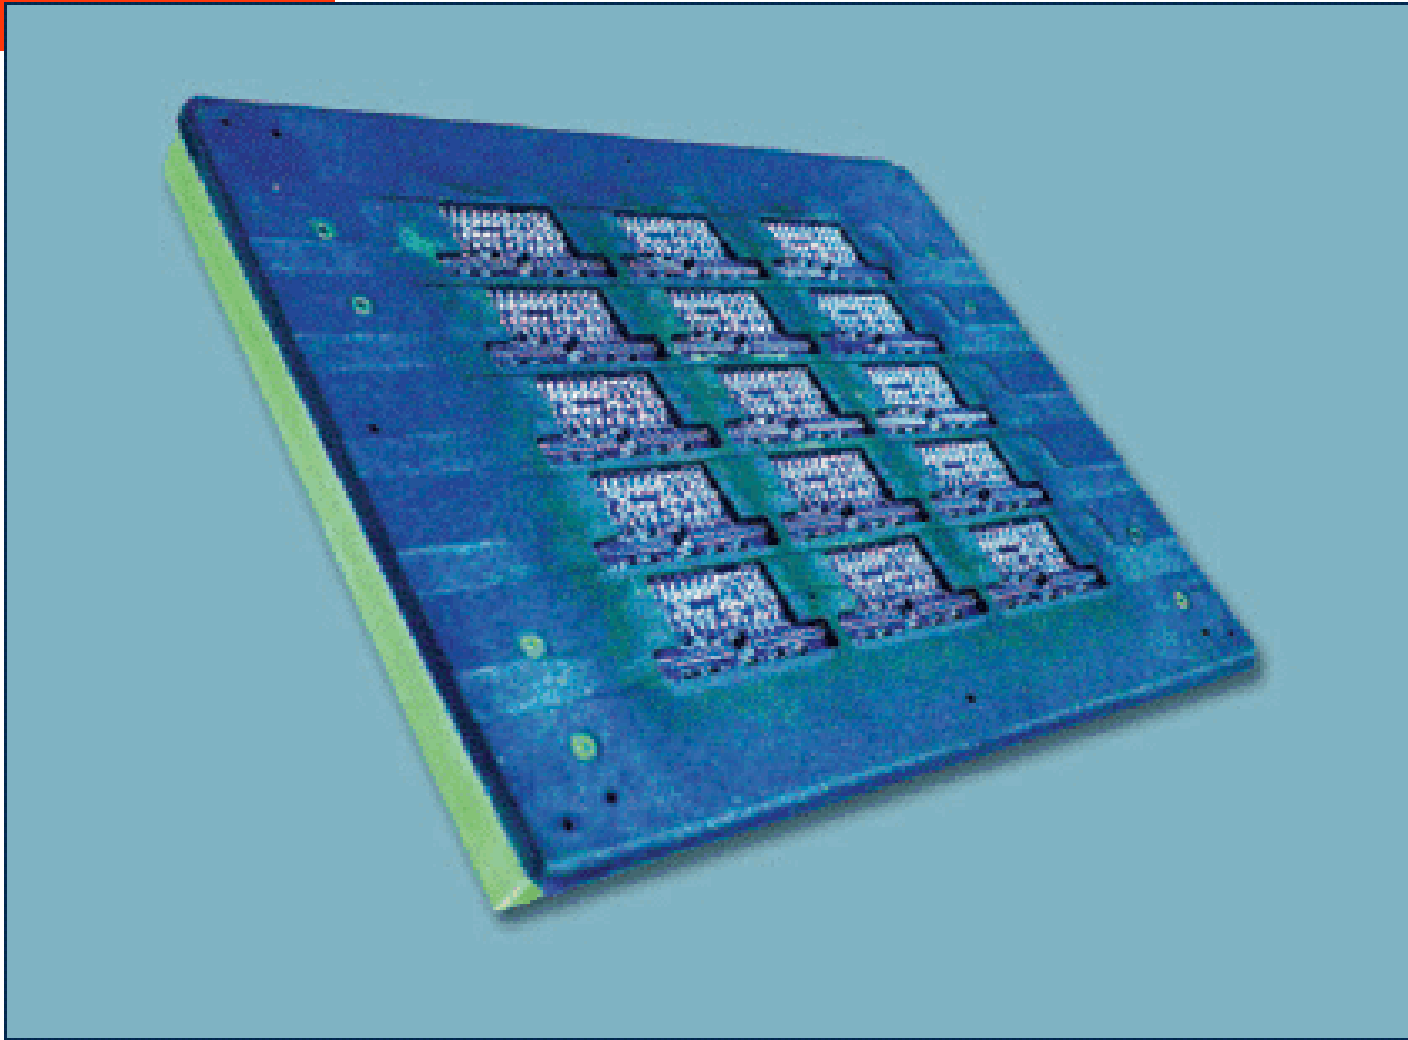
Bottom side of board is masked to only allow exposed pins to see the solder wave.
